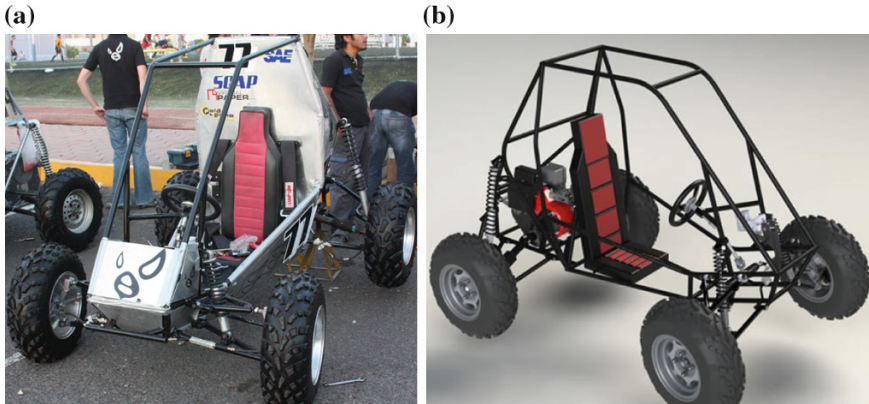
Baja SAE. a Physical Car. b CAD
